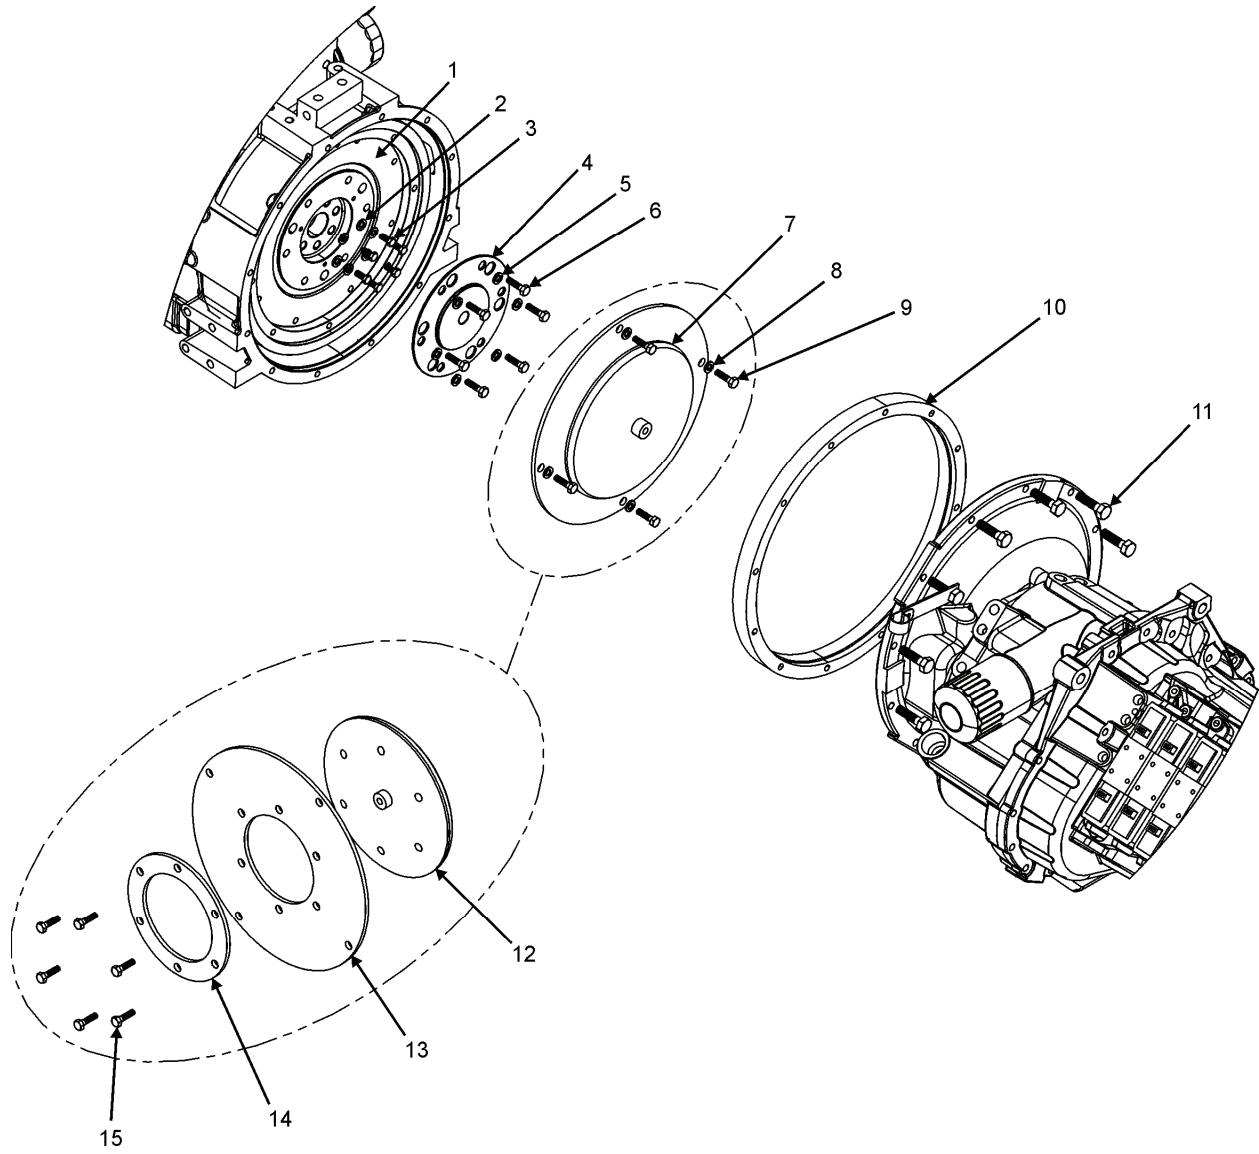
Transmission Torque Converter Assembly (Removal and Installation)
